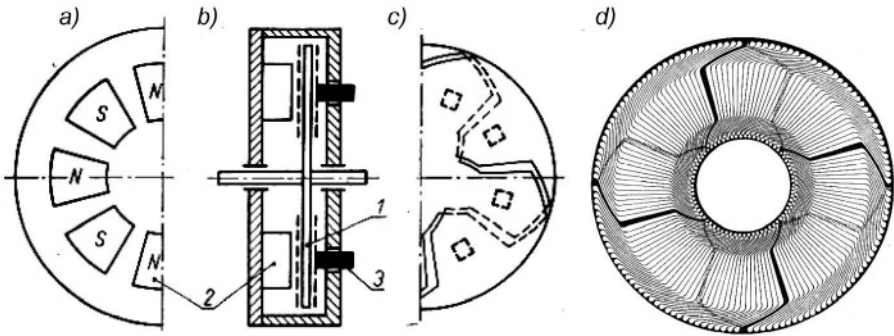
AFMPM 8-pole d.c. commutator motor with printed rotor winding: (a) stator with PMs, (b) cross section, (c) rotor (armature) windings and brushes, (d) construction of  $2p = 8$  winding with 145 bars. 1 — rotor with double-sided printed winding, 2 — PMs, 3 — brushes.
